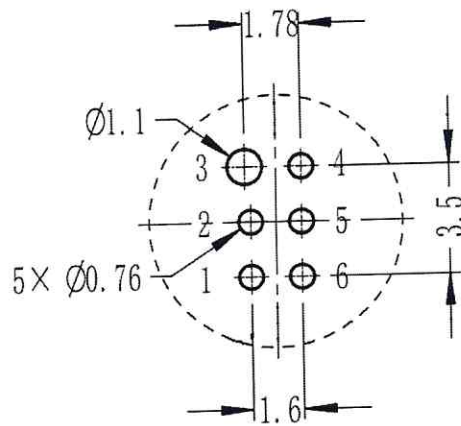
Recommended motherboard PCB layout design dimensions (top view)
